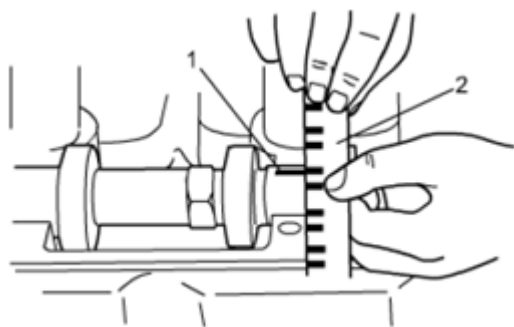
Identifying Camshaft Journals Pitting Area
